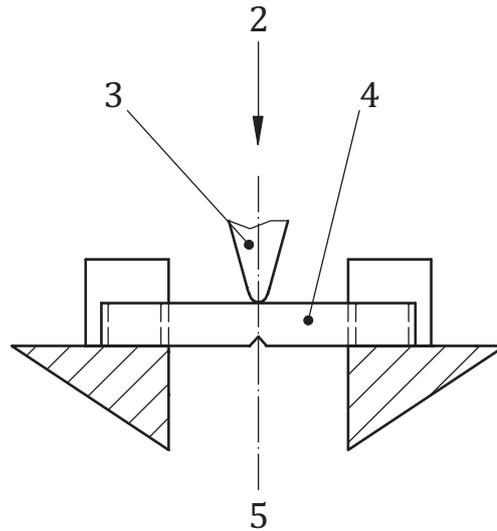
Description of the transverse and longitudinal impact test pieces
